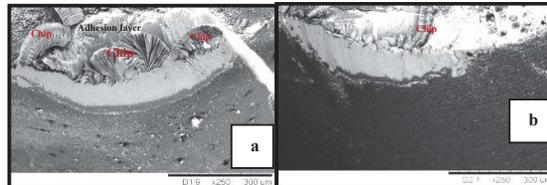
Wear mechanism at $V_c = 110$ m/min for (a) dry and (b) cryogenic from tool edge view.
